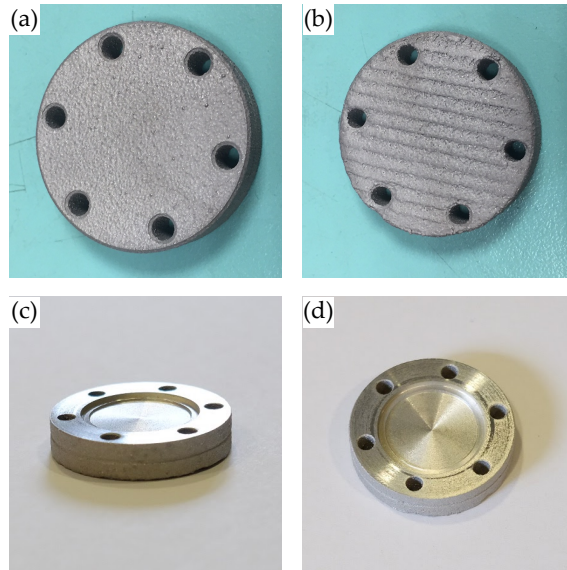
Images of a CF16 3D printed vacuum flange. (a) Post-printing, top surface of the flange. (b) Post-printing, bottom surface of the flange. Ridges where the support structs were printed and then removed are clearly visible. (c) Glancing view of flange post-processing, showing the knife edge on the internal ring. (d) Top view of post-processed flange.
